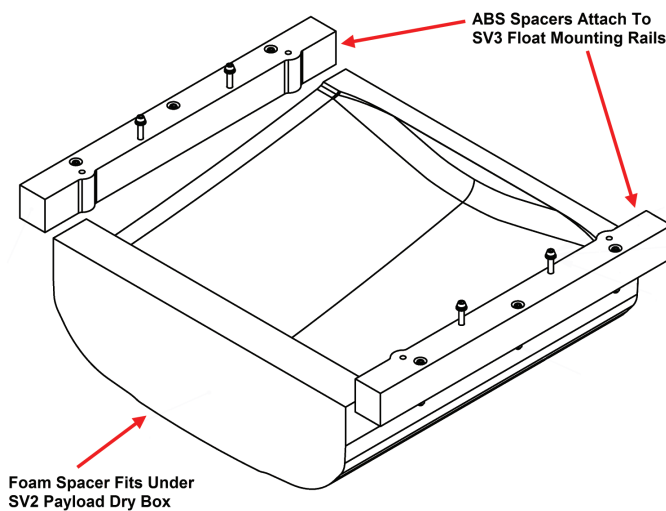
SV2 Short Aft Payload Dry Box - SV3 Mounting Kit (Liquid Robotics Part Number 05224)
